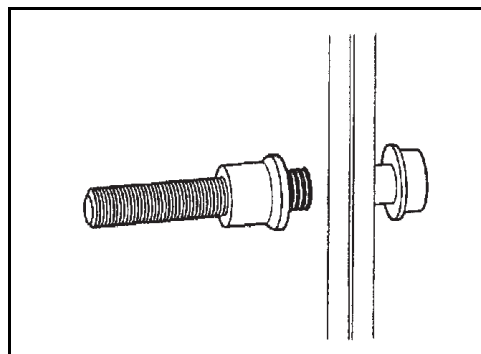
Place Collar Over Fastener Pintail 01_0019
